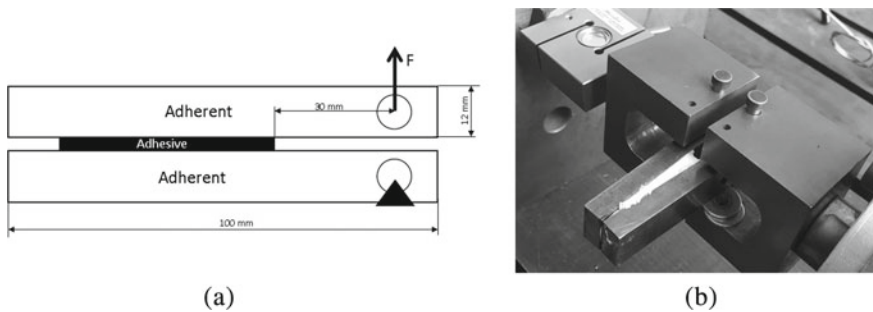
Tear test tube (DCB) (a), test equipment (b)
